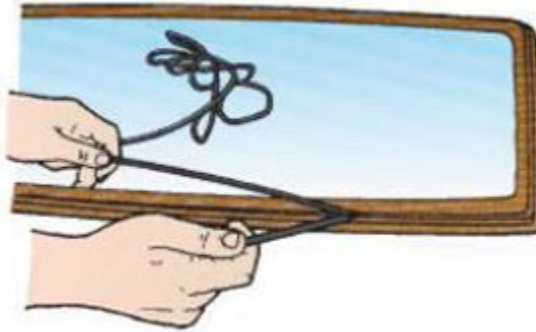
Insert the cord in the pinch weld groove of the gasket
